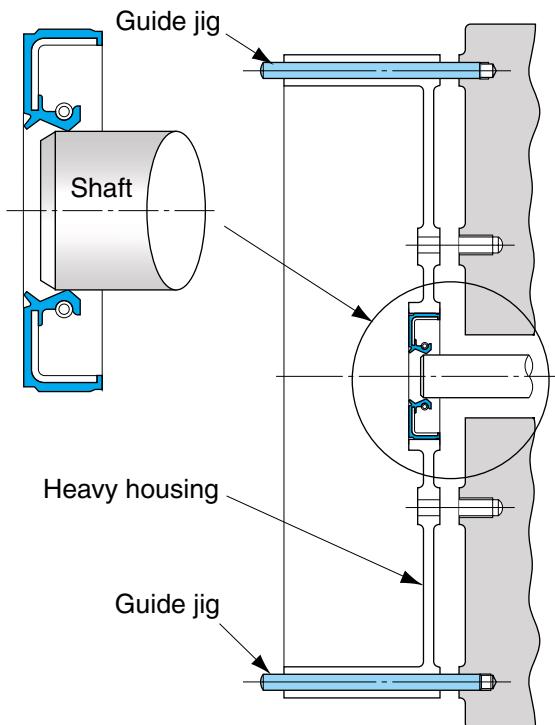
Guide jig for mounting of heavy housing with seal onto shaft
